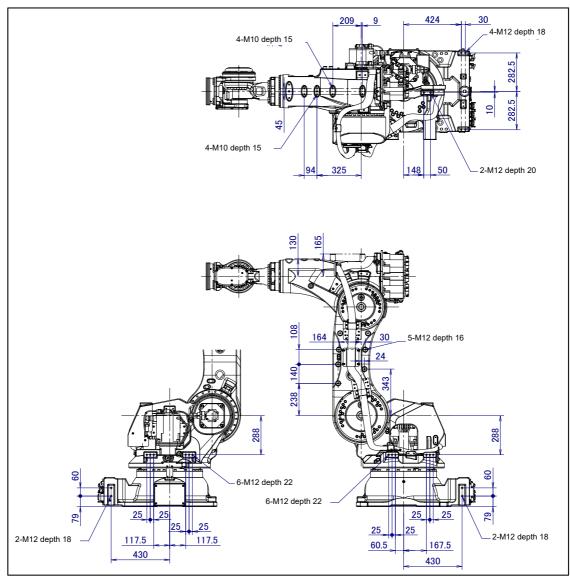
(g) Equipment mounting faces (R-2000iC/190S)
